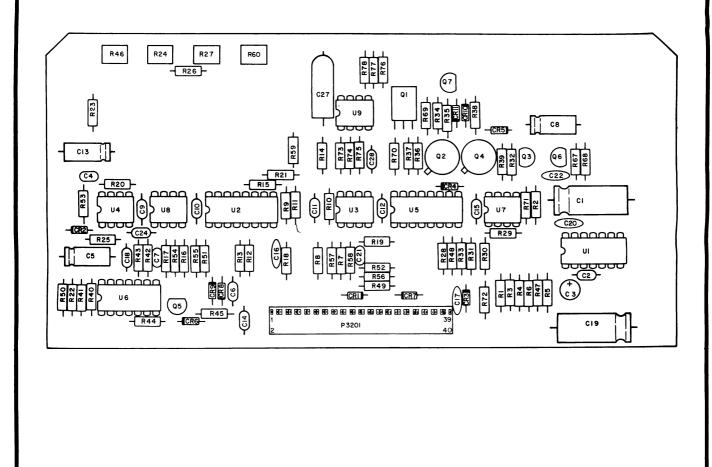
GENERATE AUDIO PC BOARD ASSEMBLY
